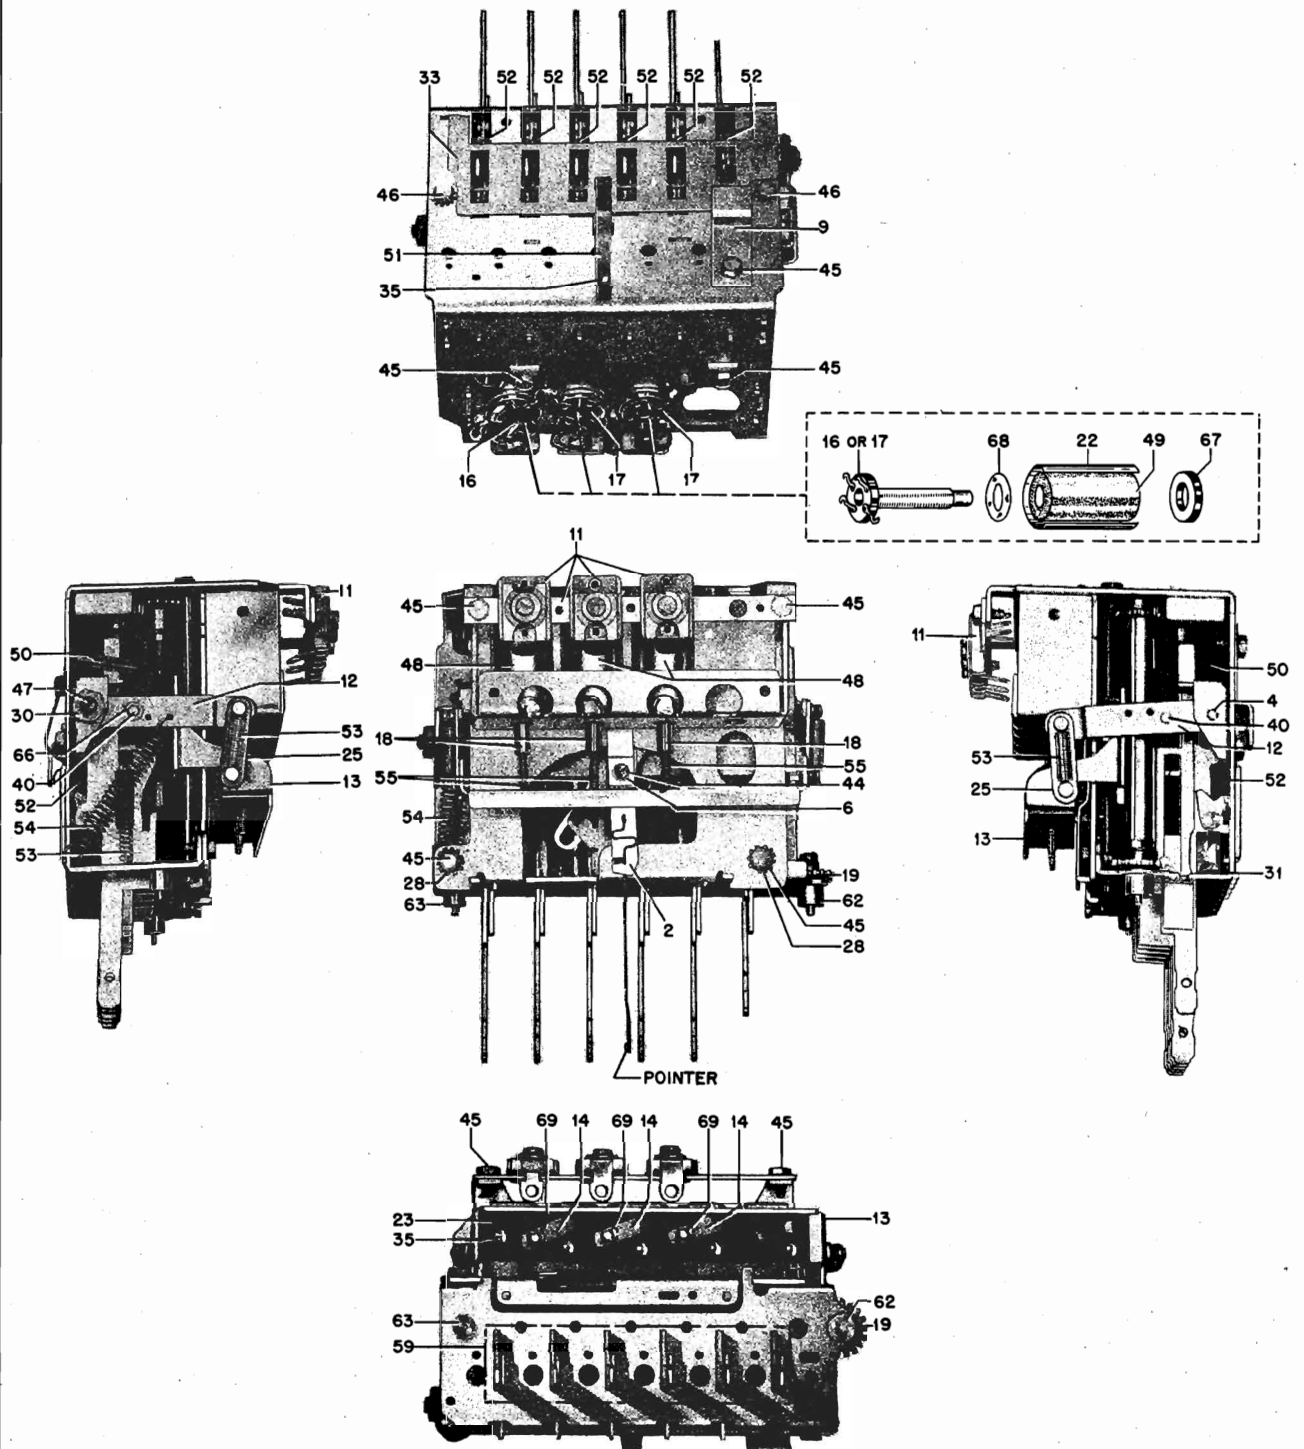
AUTOMATIC TUNER AT-58 PARTS LOCATIONS
